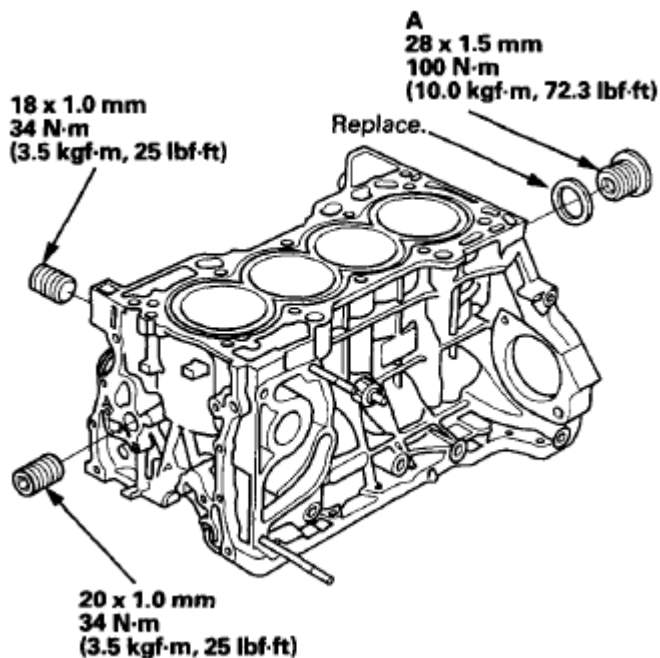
Identifying Sealing Bolt With Torque Specifications
